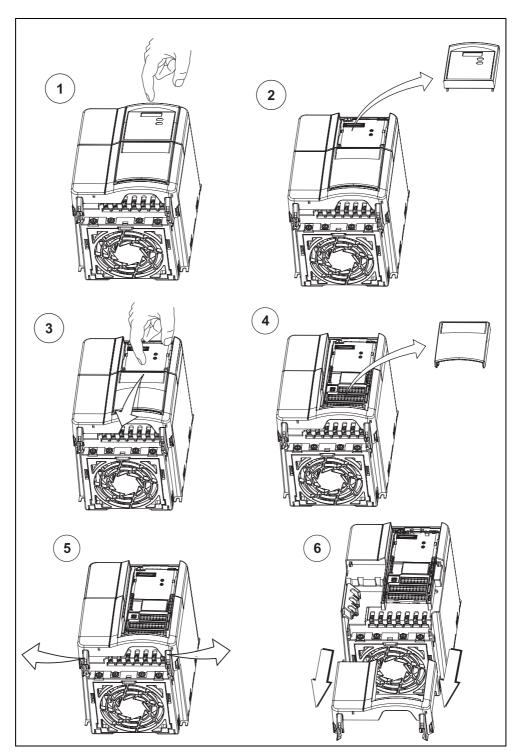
Removing front covers (Frame Sizes B and C)
